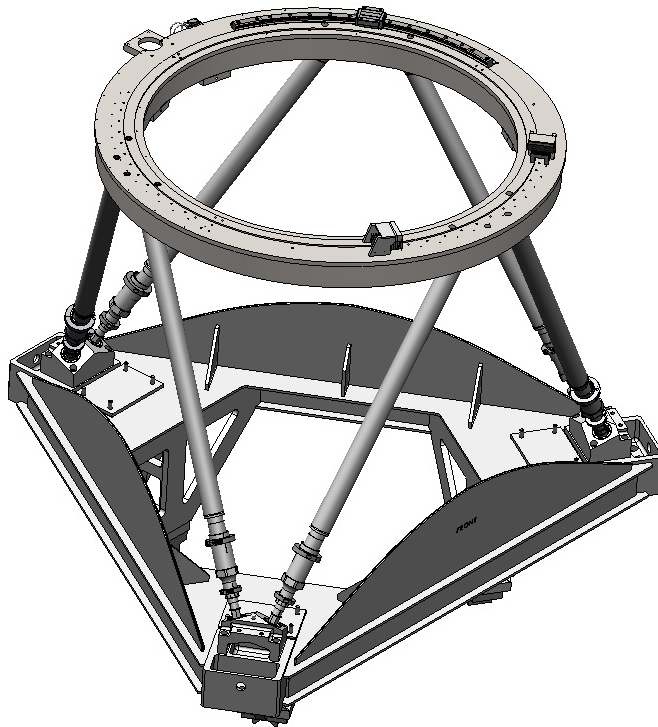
A model of the completed PFIP support assembly is shown [24].
